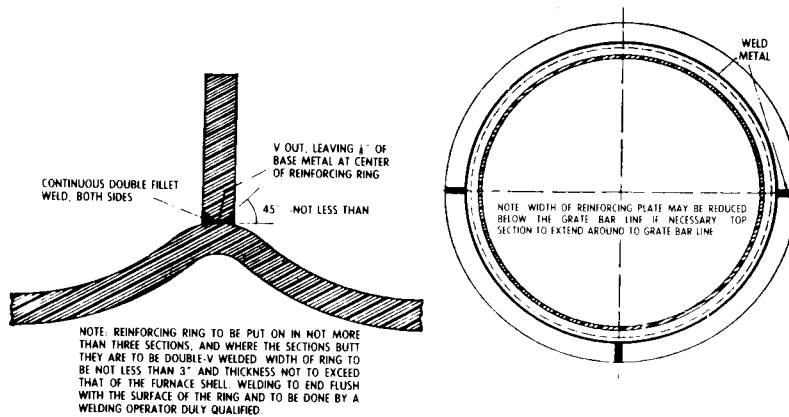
APPROVED METHOD OF REINFORCING FURNACES BY MEANS OF ARC OR GAS WELDING
